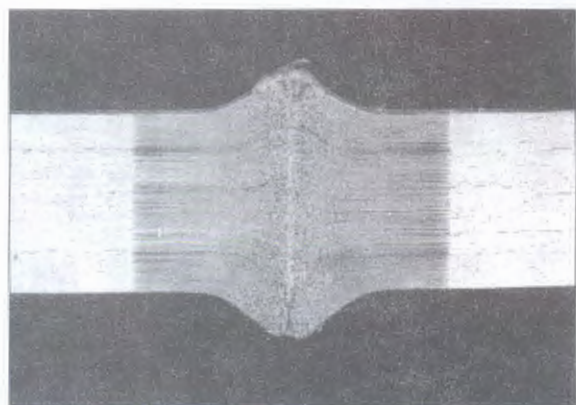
Macrostructure of light band in welded joint after etching
